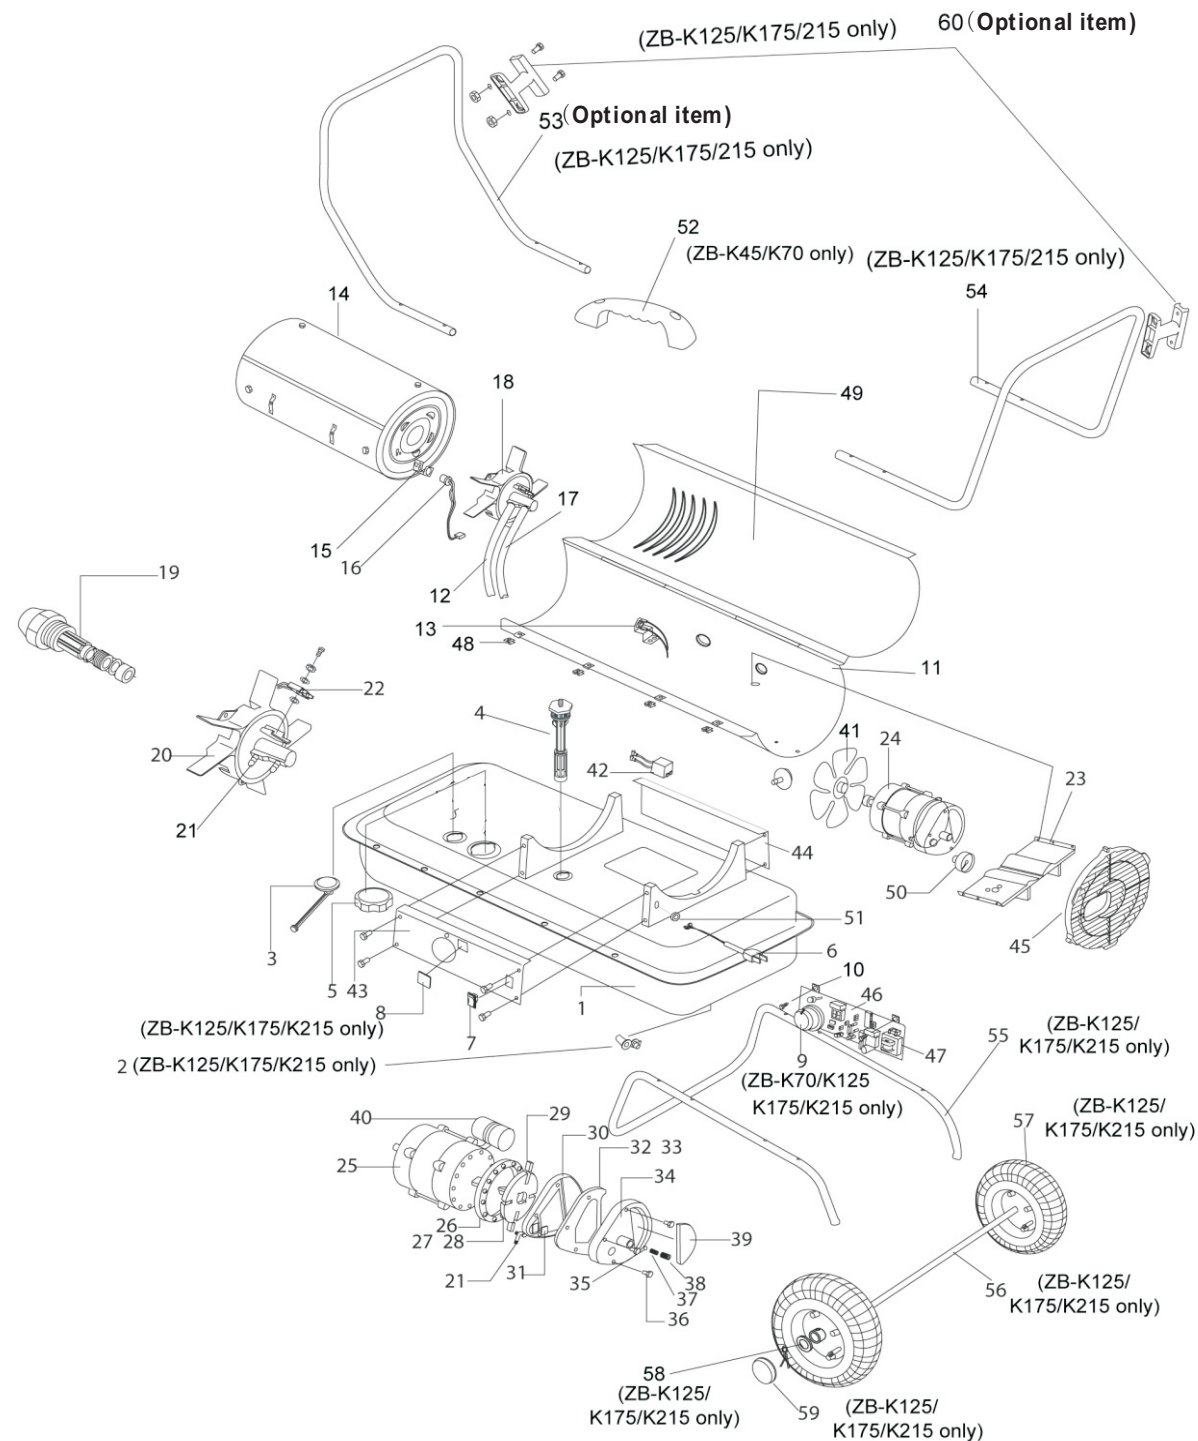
Exploded View Models ZB-K45/K70/K125/K175/K215
